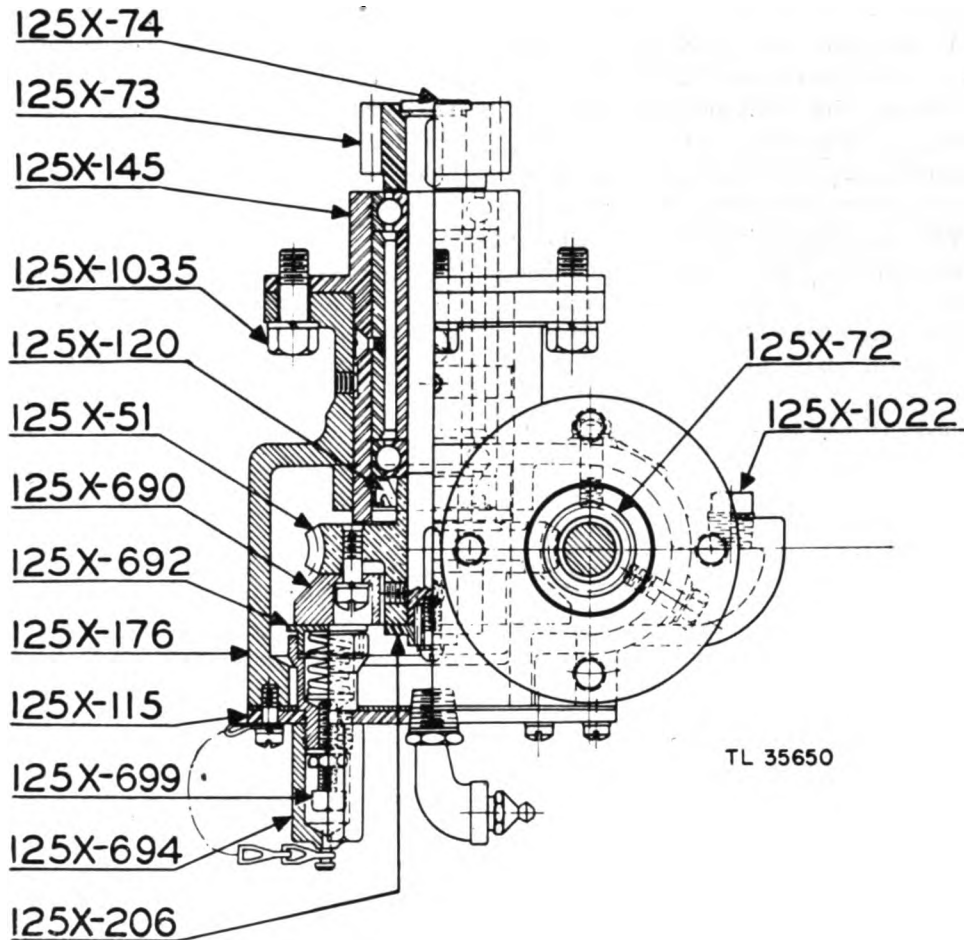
Tower TR-24-A, worm-gear vertical shaft mechanism.
